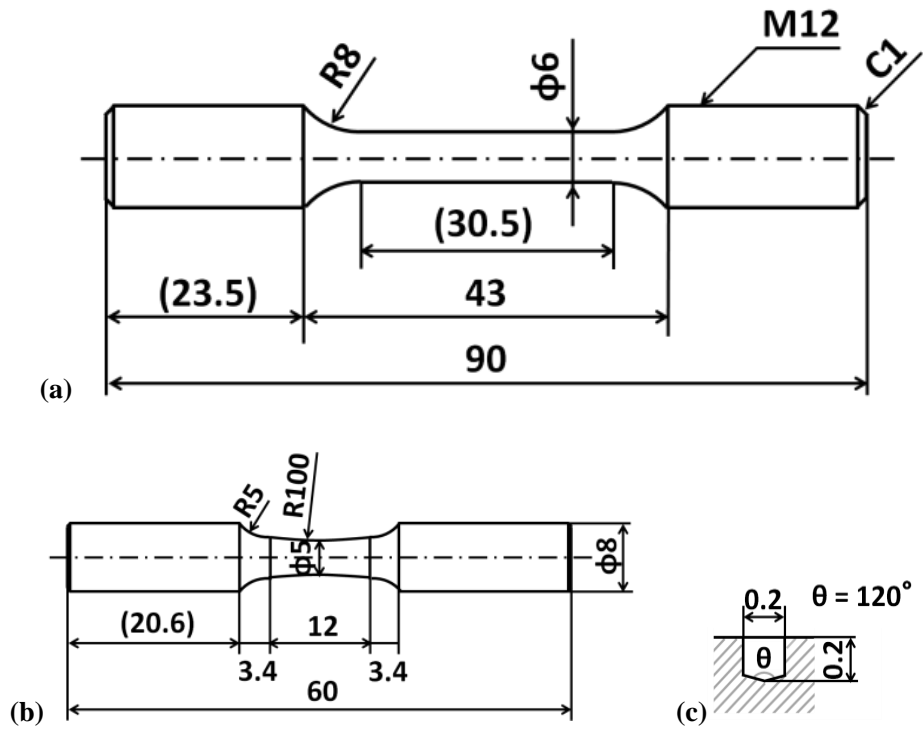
Shapes and dimensions of specimens (unit: mm): (a) tensile test specimen;
